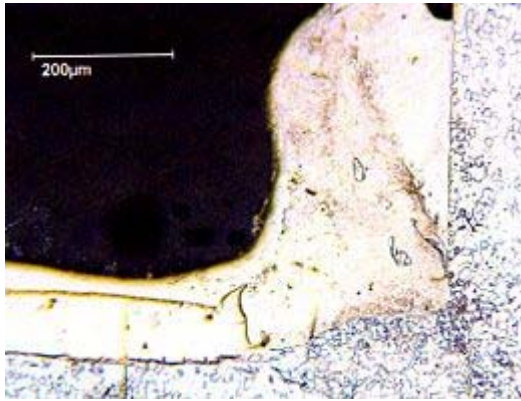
Detailed Section of Fig. 20 near the Welding Zone
